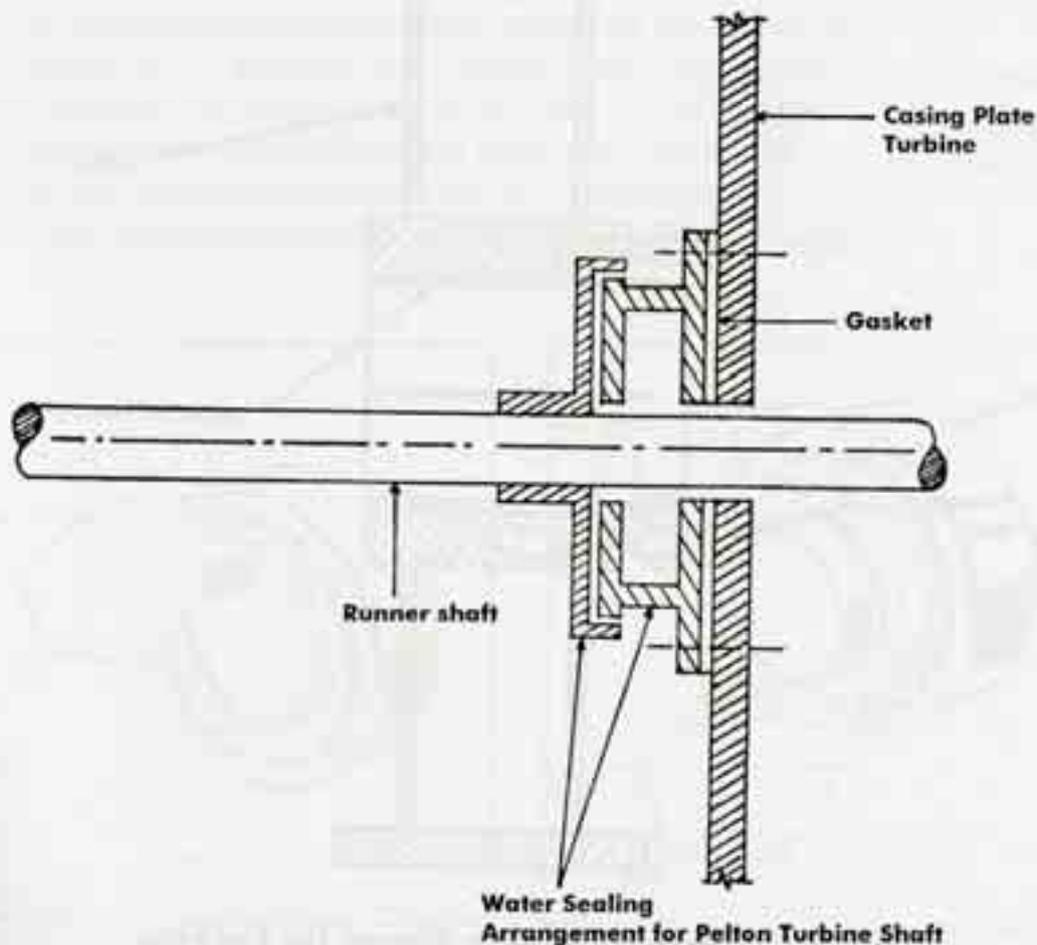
Non-Contact Seal for Pelton Turbine Casing
